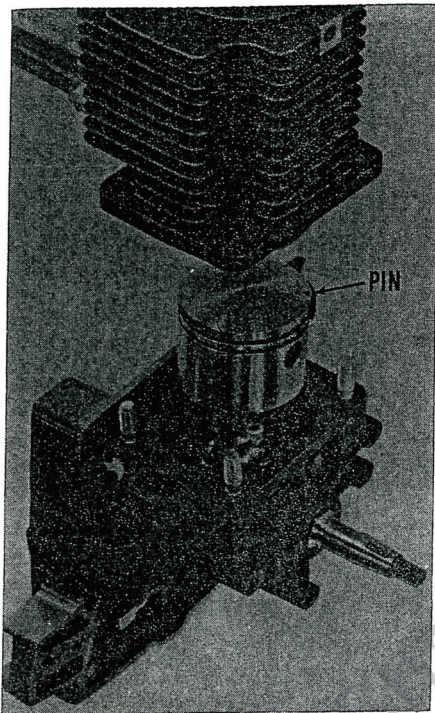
Piston and connecting rod assembly can be removed from crankpin after removing cylinder from crankcase. Note piston ring locating pin on intake side of piston.
